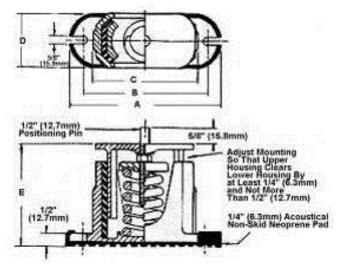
Spring Flex Mounting (CP-2) Isolator Dimensions
